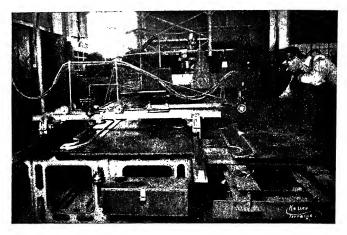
Oxy-acetylene shape cutting machine. The templet at the left automatically guides the cutting blowpipe.
